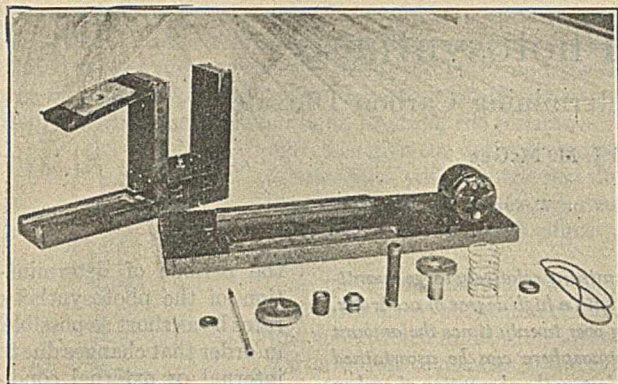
THE MILL DISMANTLED SHOWING ALL PARTS EXCEPT THE RECEIVING CUP
